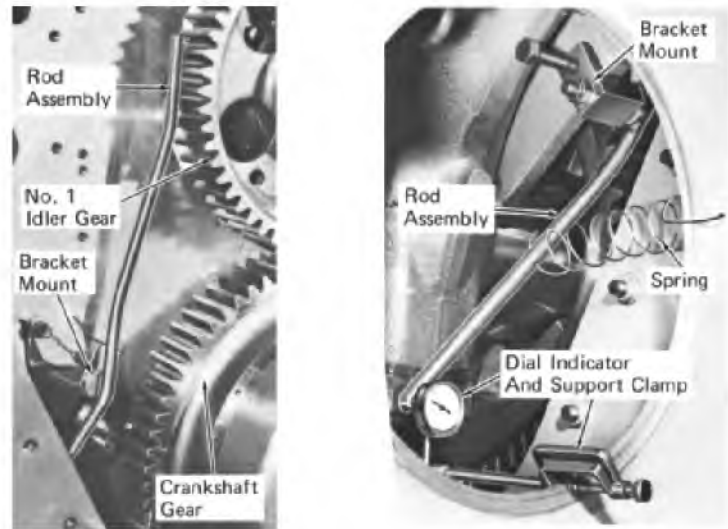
Application Of Parts For Checking Bearing Clearance
